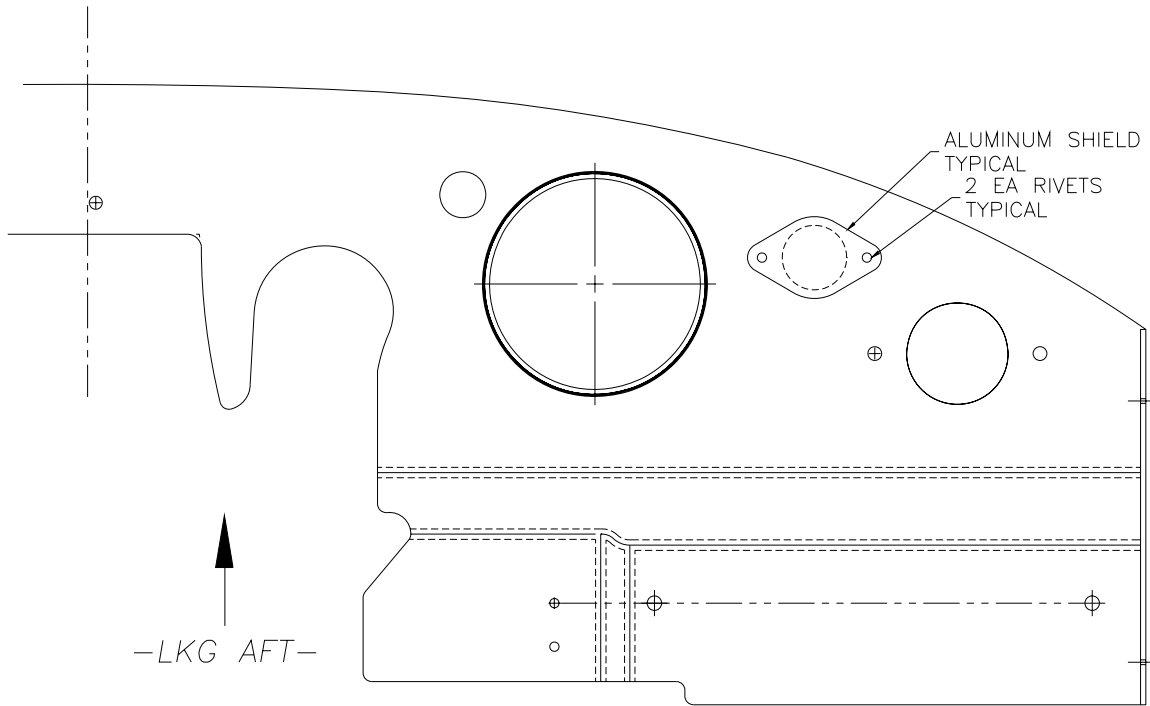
Plug Mixture Cable Hole in Aft Baffle
